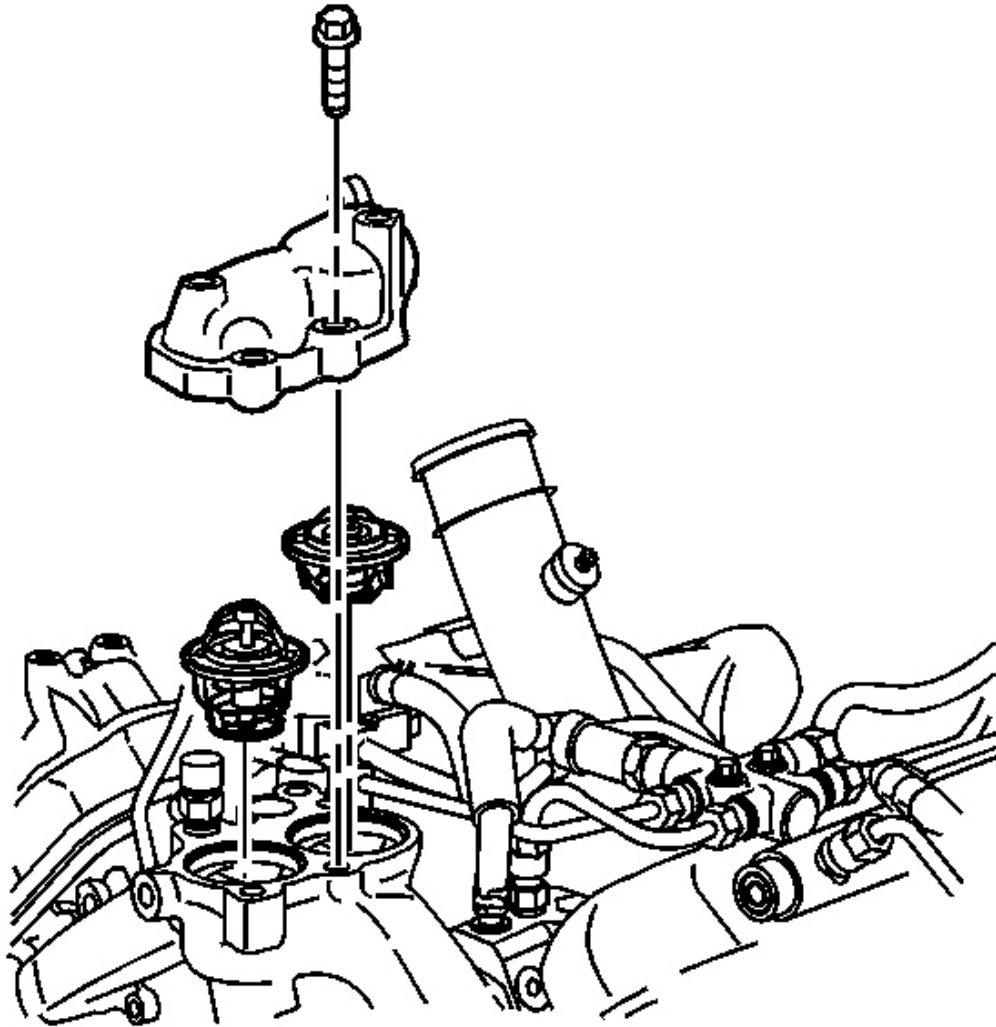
View Of Bypass Pipe & Thermostat Housing
